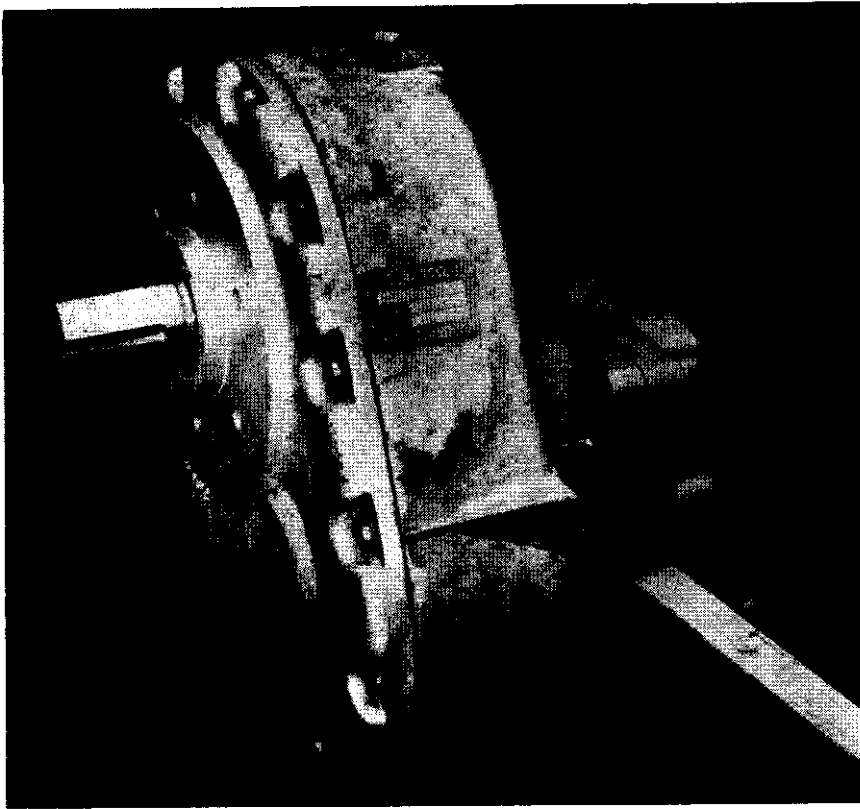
Hydraulic motor and marine gear reducer provides economical low-speed high-torque input using standard hydraulic motors for converting a mechanical winch to hydraulic drive.
